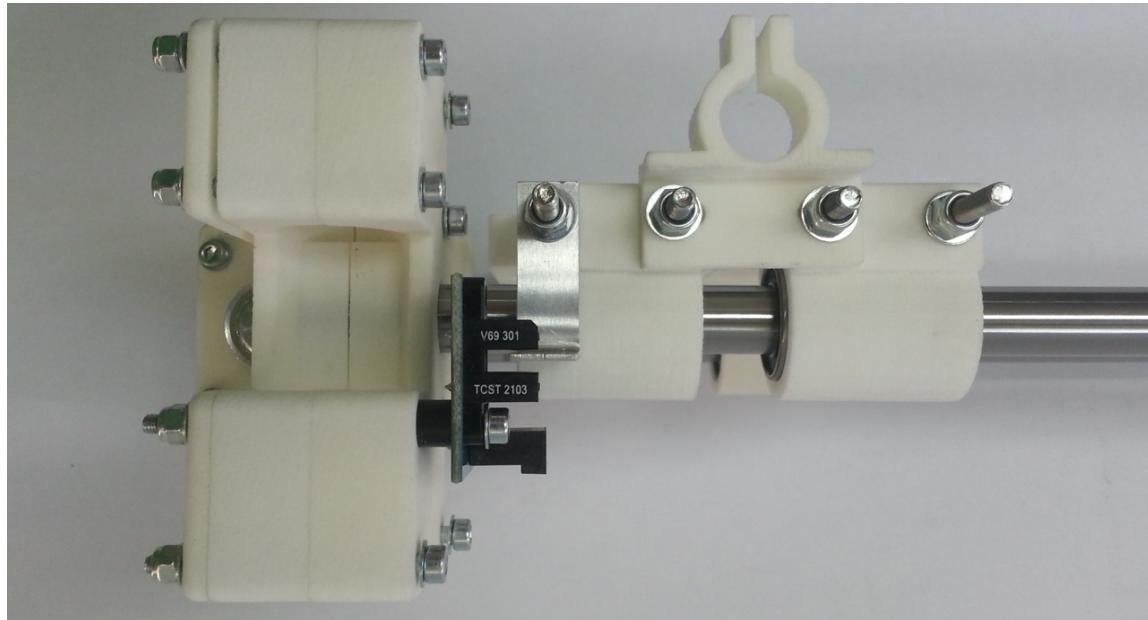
Finish X-axis carriage (Single-Extruder)
